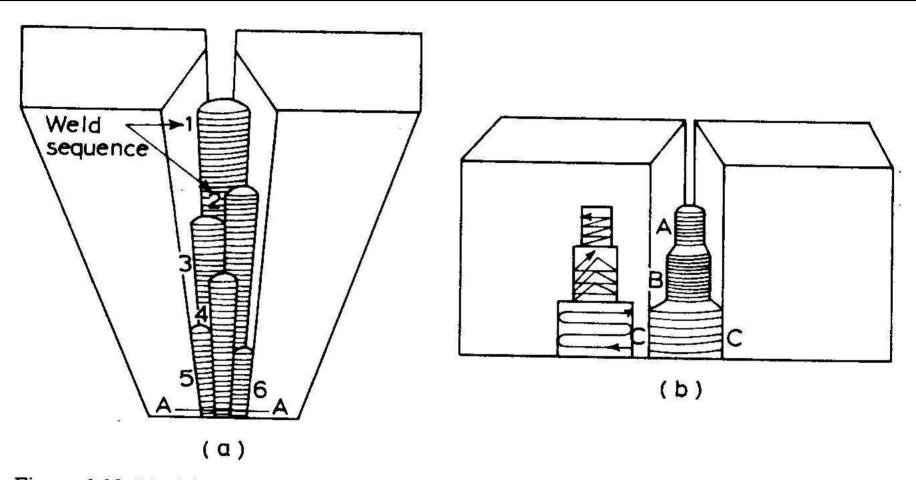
Ideal filler metal configurations of (a) a single vee-butt weld and (b) a vertical butt weld. After Woods, P.F., Fundamentals of Welding Skills, Macmillan, London, 1976
